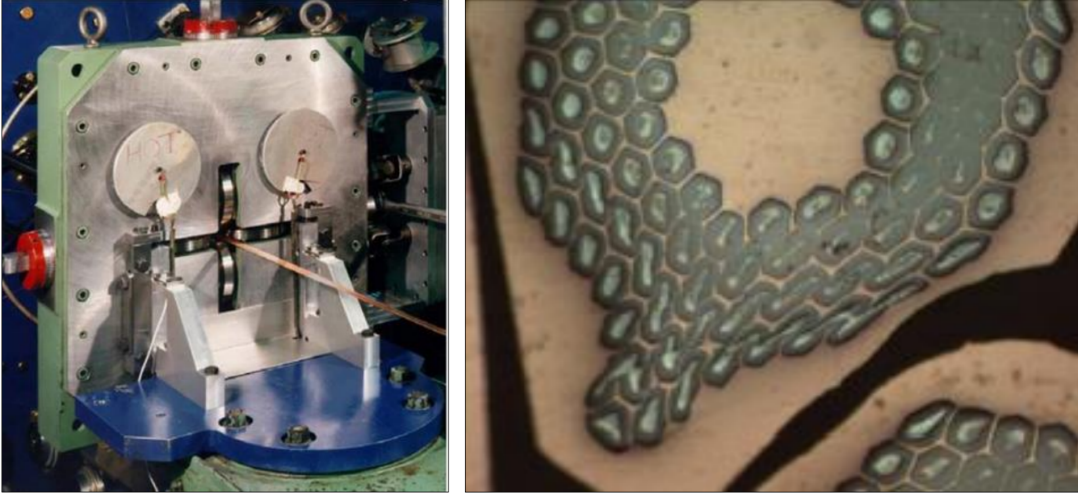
Turk's heads, left, and example of deformed Nb_3Sn filaments after cabling manufacturing.
